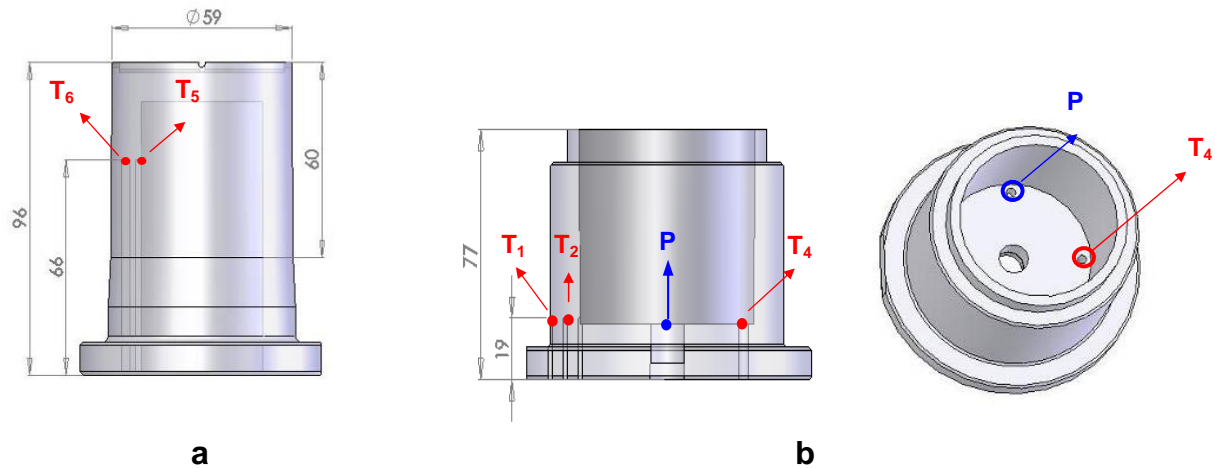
HM-1 moulding blocks and sensors location: a) core, b) cavity
